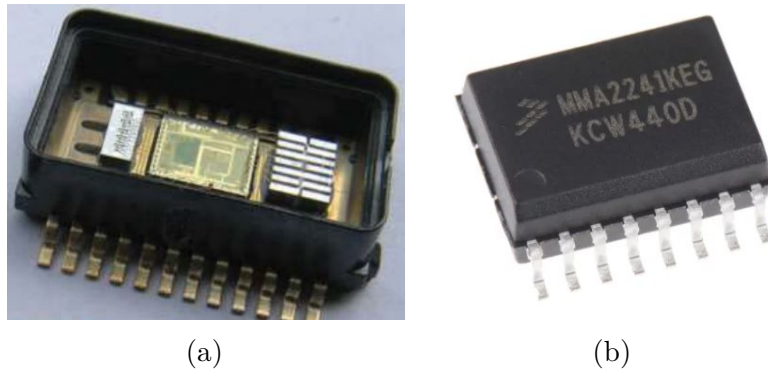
(a) Pre-moulded cavity housing [37] (b) Over-moulded Housing [38]
